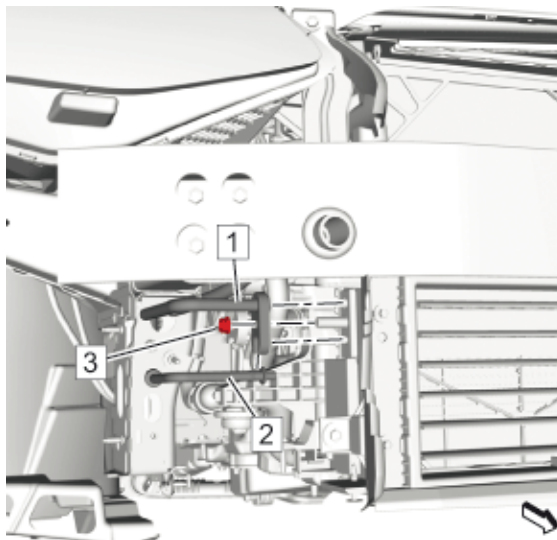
Air Conditioning Evaporator Tube, Condenser Tube And Nut
